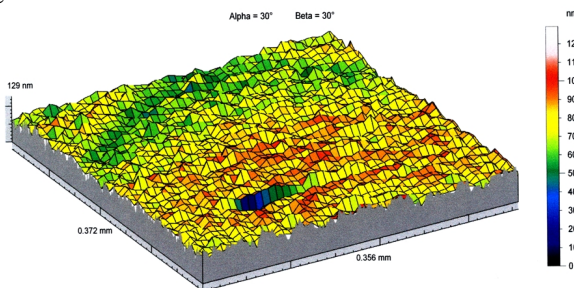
Geometrical configuration of a surface of Weller endoprosthesis head outside scratch limits
